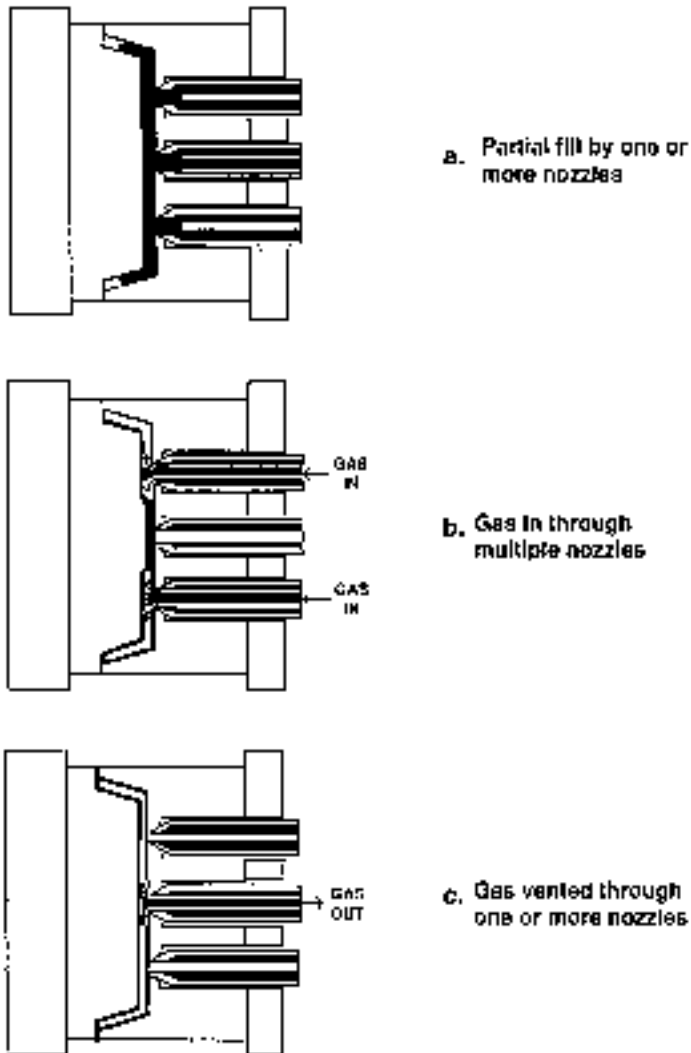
Multi-nozzle gas-assist molding: (a) material is injected through multiple nozzles, (b) gas is injected through multiple nozzles to fill out part and hold pressure, (c) gas is exhausted through one or more nozzles
